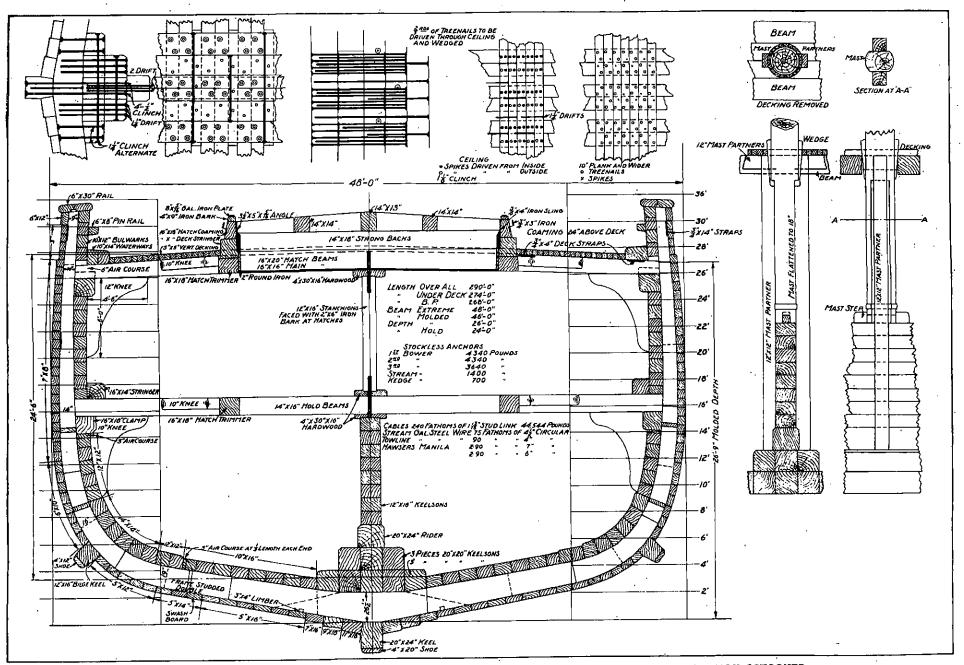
MIDSHIP SECTION AND CONSTRUCTION DETAILS OF A 290-FOOT, 5-MASTED TOPMAST AUXILIARY SCHOONER
